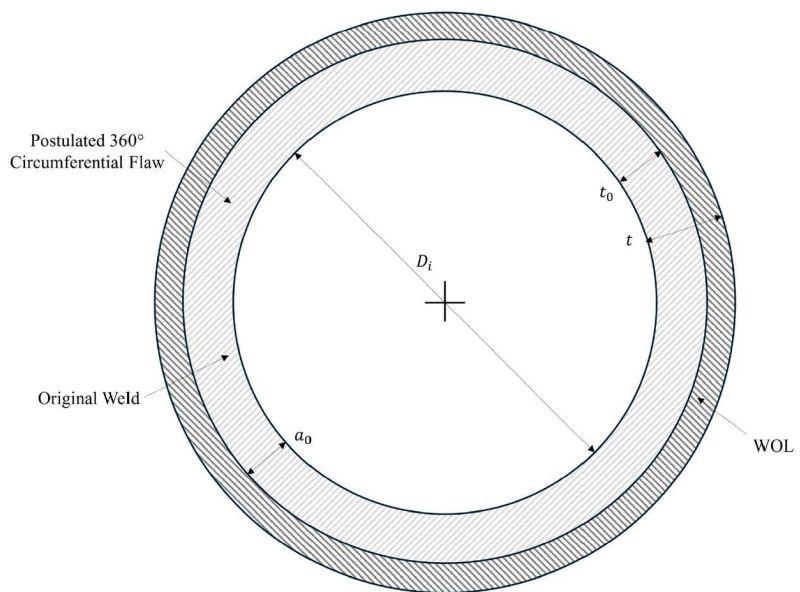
Inside Surface-Connected, Partial Through-Wall, 360° Circumferential Flaw
